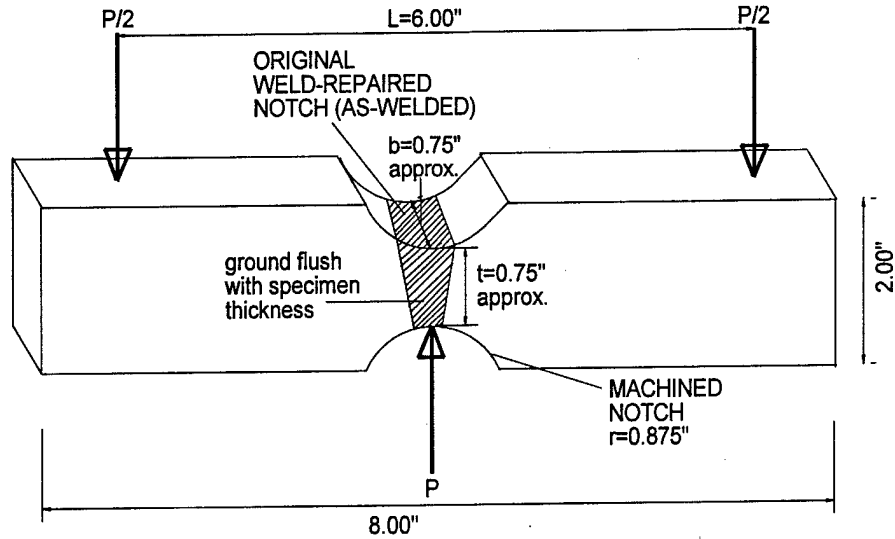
Schematic of weld-repaired fatigue test specimen.
